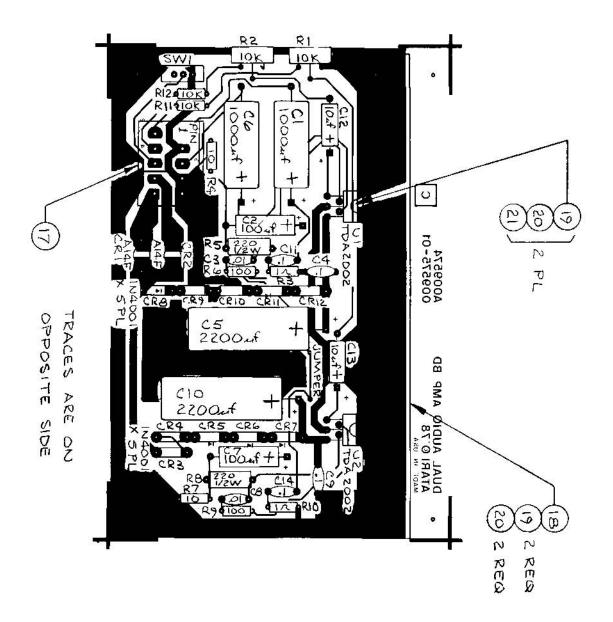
Dual Audio Amplifier PCB Assembly A009574-02
